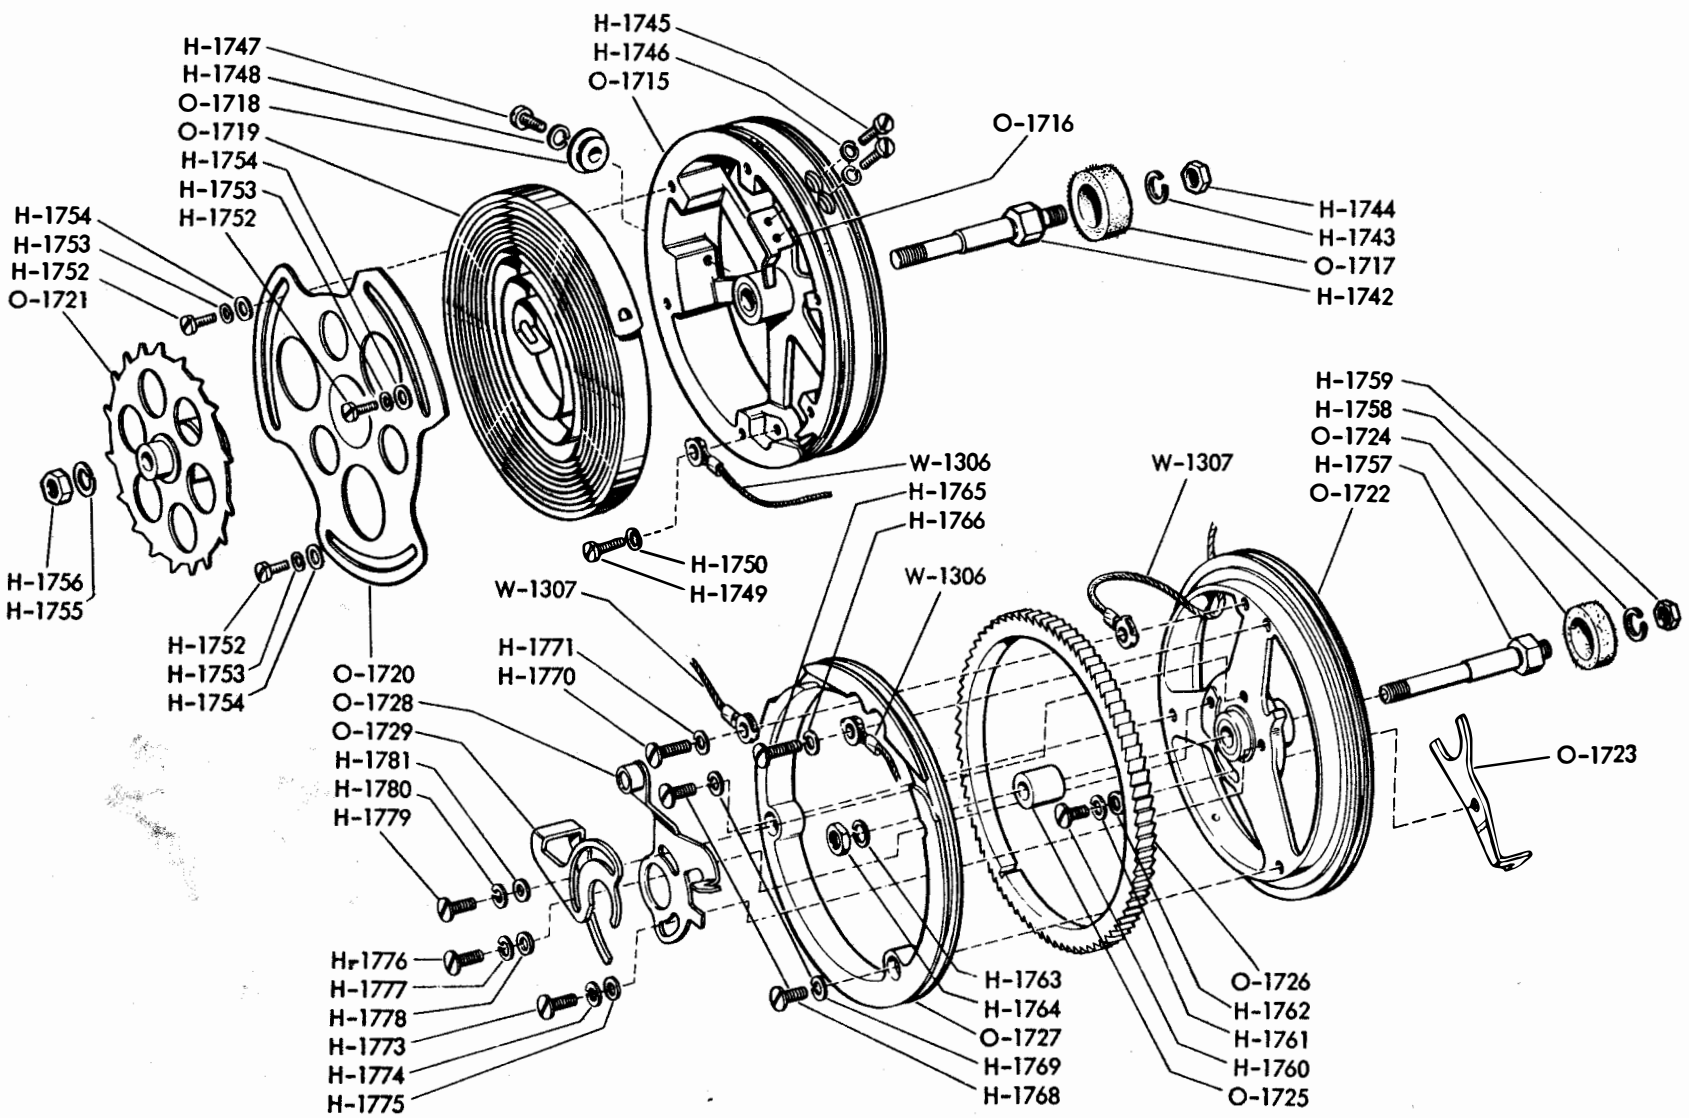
Automatic Typewriter, Spring Drum Mechanism
